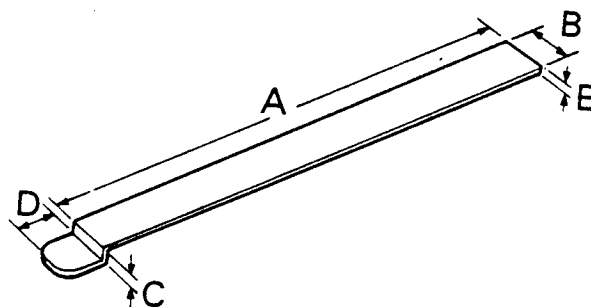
FEELER GAUGE — LAYCOCK CLUTCH
